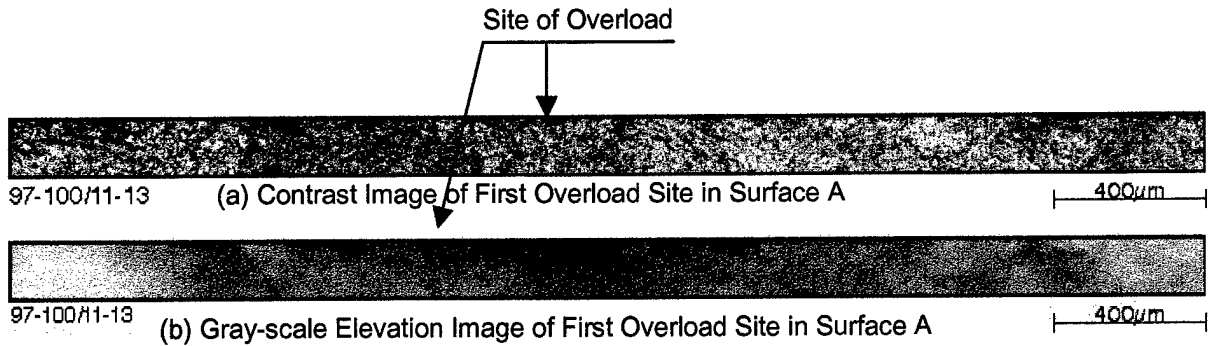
Contrast and gray-scale elevation images of fracture surface area surrounding overload site.
